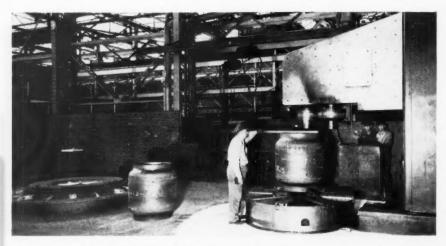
View of company-designed distributor mill. Floor furnace may be seen at the left.
